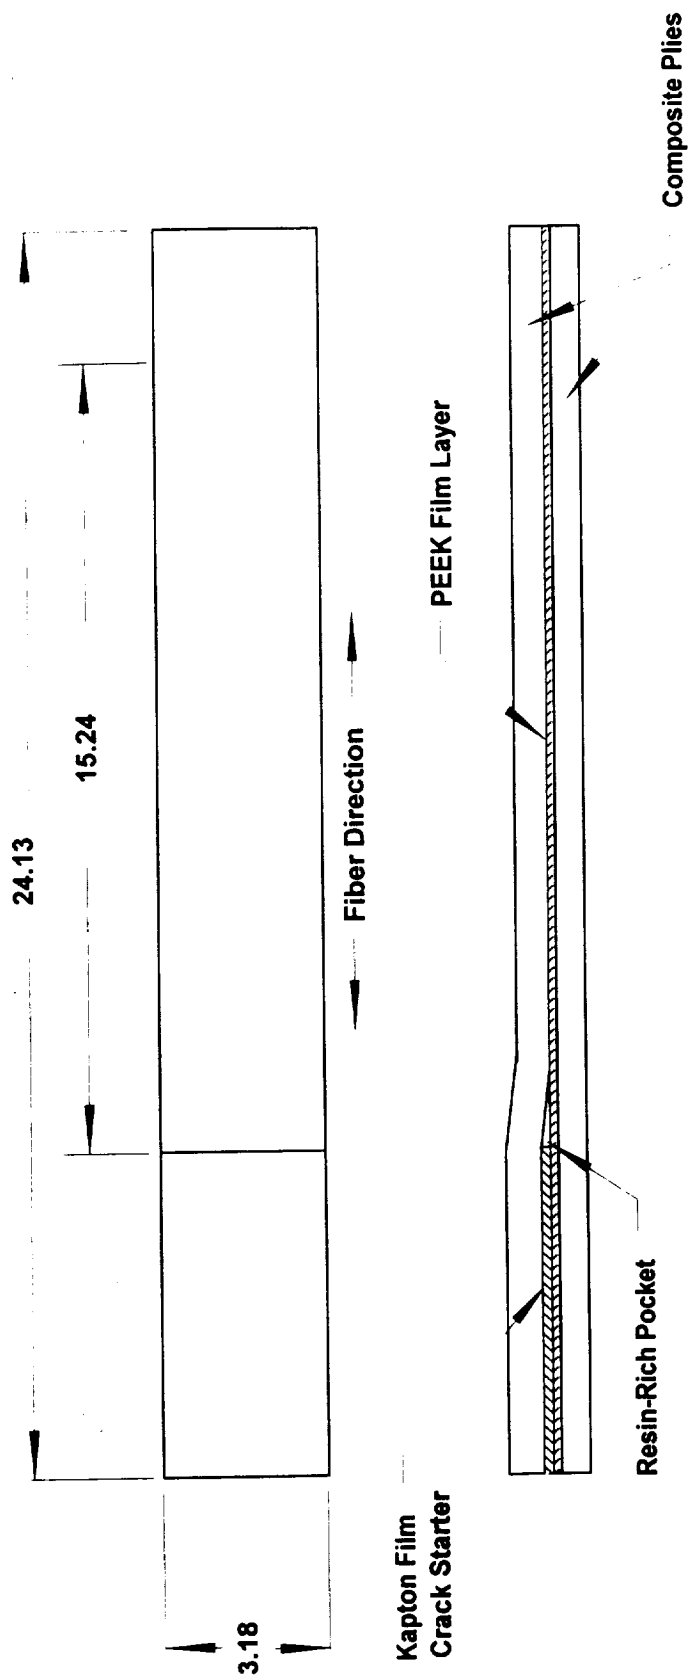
Wedge peel specimen geometry. Scale in lower view is exaggerated for clarity.
